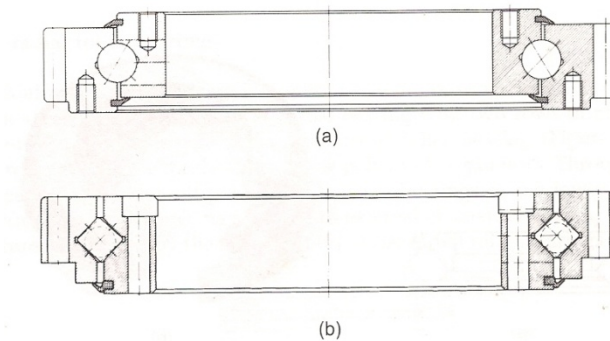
Slewing bearings: (a) four-point bearing (b) cross-roller bearing [3]
